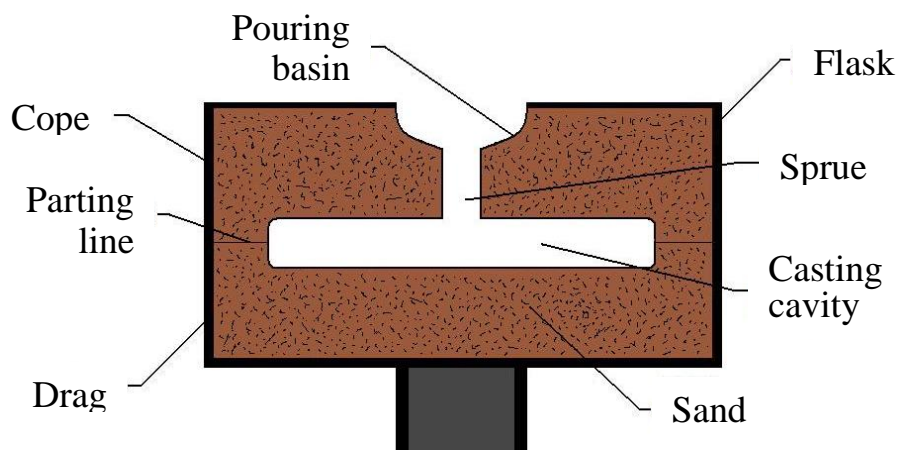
Semi-centrifugal casting expendable sand mold used to manufacture a wheel
